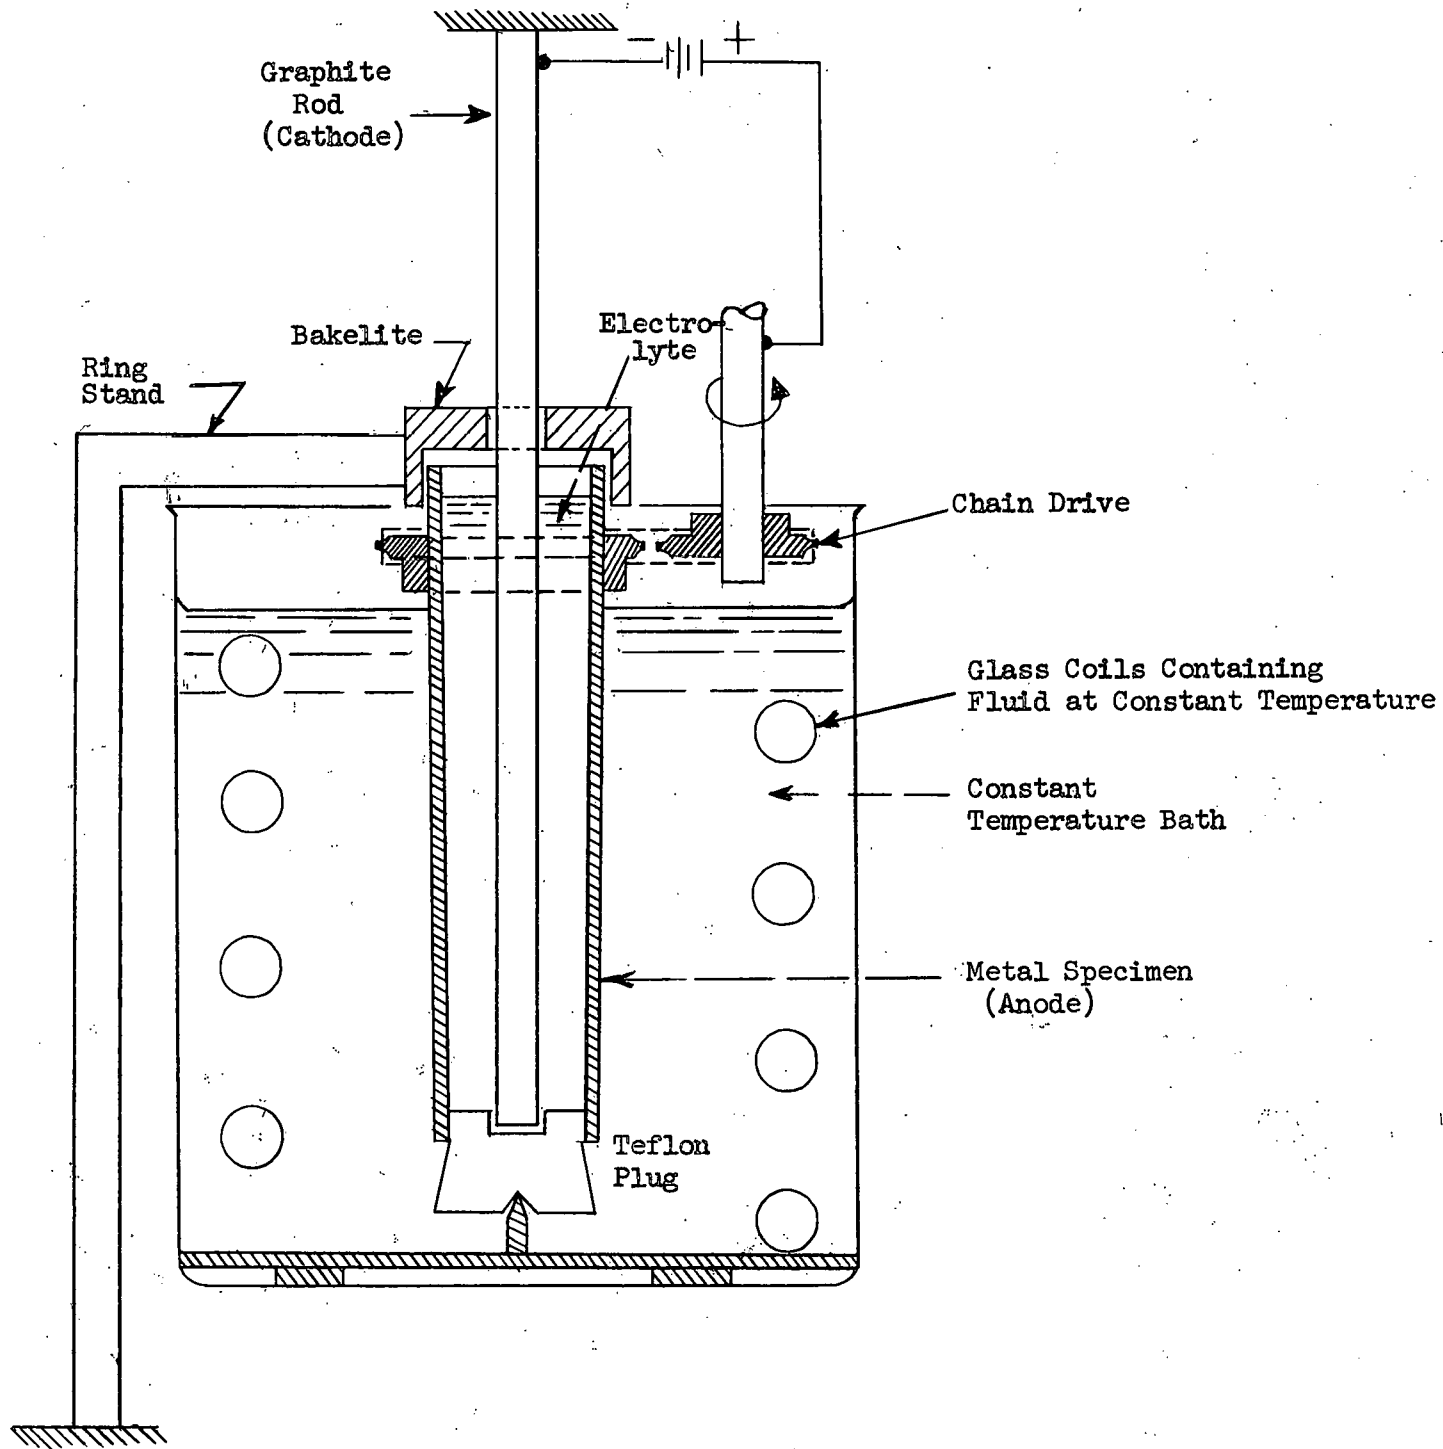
Schematic Drawing of Apparatus Used to Machining Inside Surfaces of 3/8" Sch. 10 Pipe.
